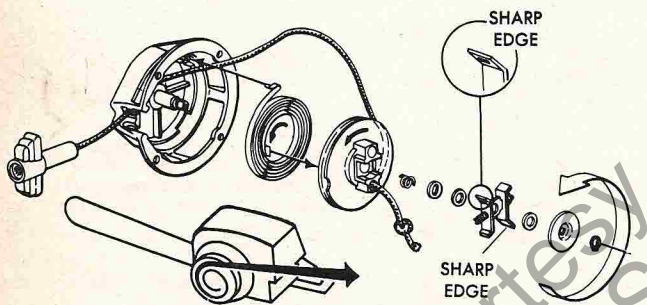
Proper assembly of Fairbanks-Morse recoil starter for clockwise pull. Used on some models.
